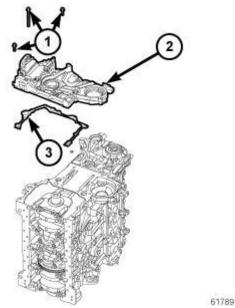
FRONT COVER AND GASKET Courtesy of CHRYSLER LLC
